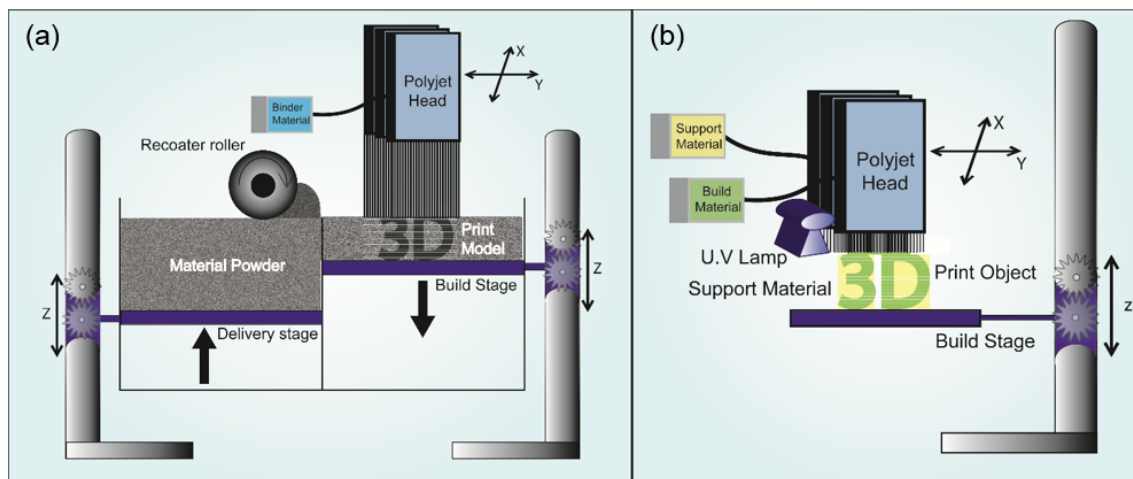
Schematic diagrams of inkjet printers: (a) binder jetting printer, (b) photopolymer jetting printer.
